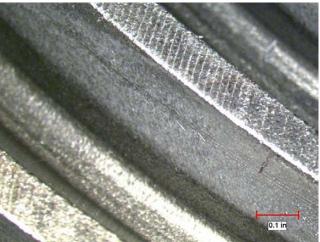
CLOSE-UP OF RING GEAR TEETH, SHOWING AREA OF LOCALIZED HIGH CONTACT STRESS AND GROOVES OR LINES PRESENT ABOVE PITCH LINE.
